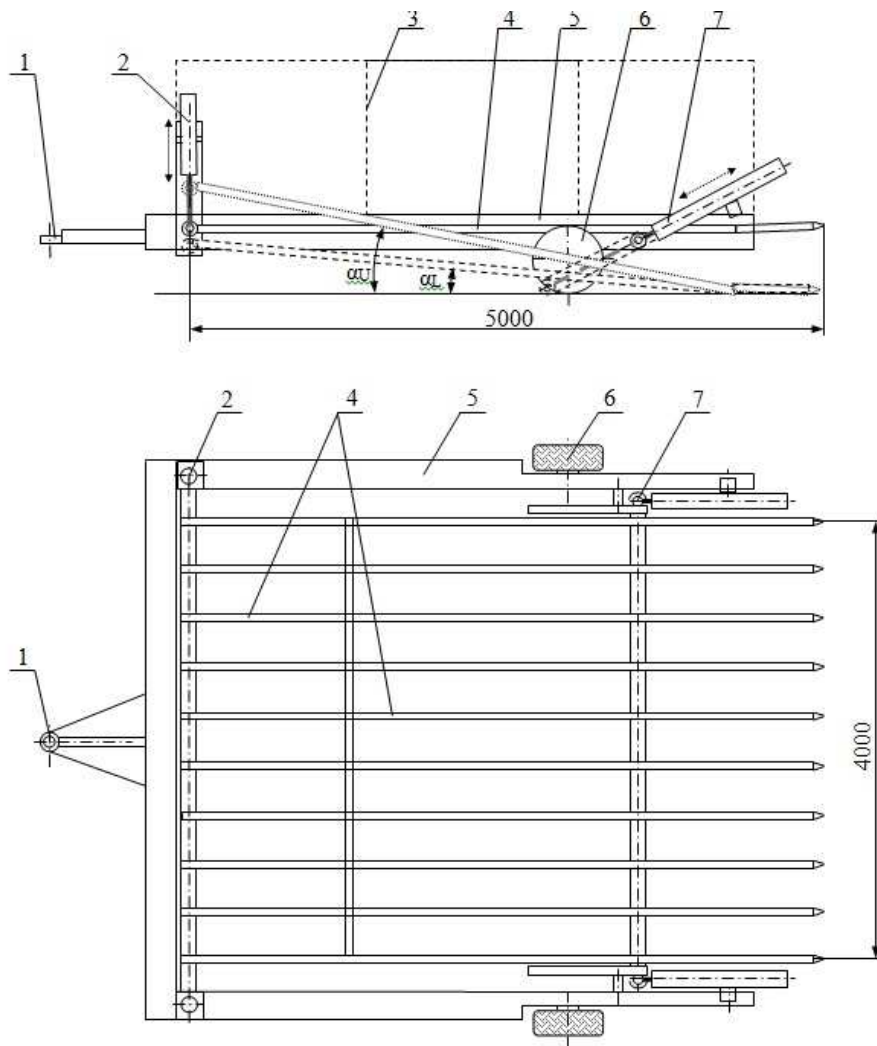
Haystack truck diagram: 1 – trailer device; 2 – mechanism of lowering-lifting of the front part of the platform; 3 – board; 4 – finger platform; 5 – haystack truck frame; 6 – wheel; 7 - lifting and lowering mechanism of the rear part of the platform
